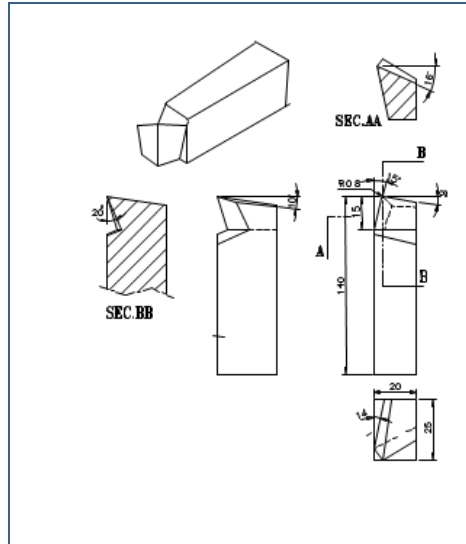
Cutting tool geometries of C45 carbon steel for turning aluminum alloy 2024
